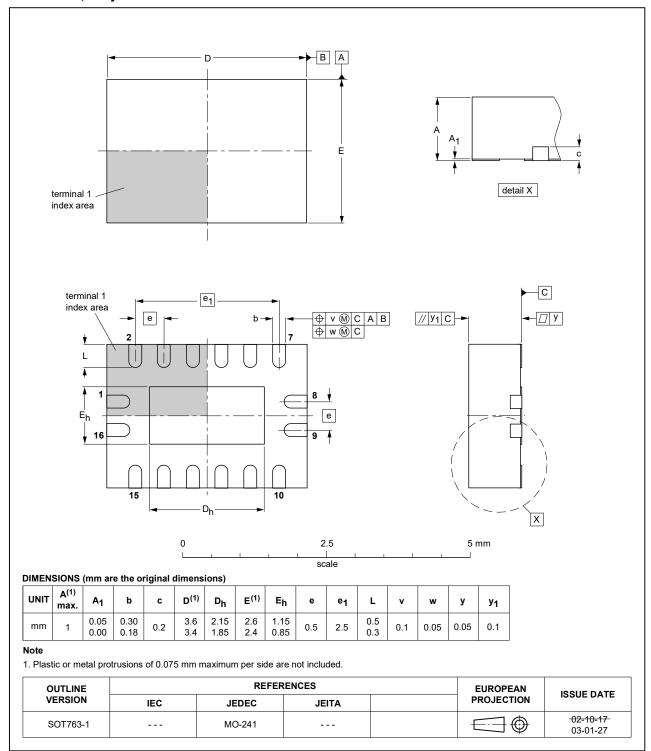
Package outline SOT763-1 (DHVQFN16)
